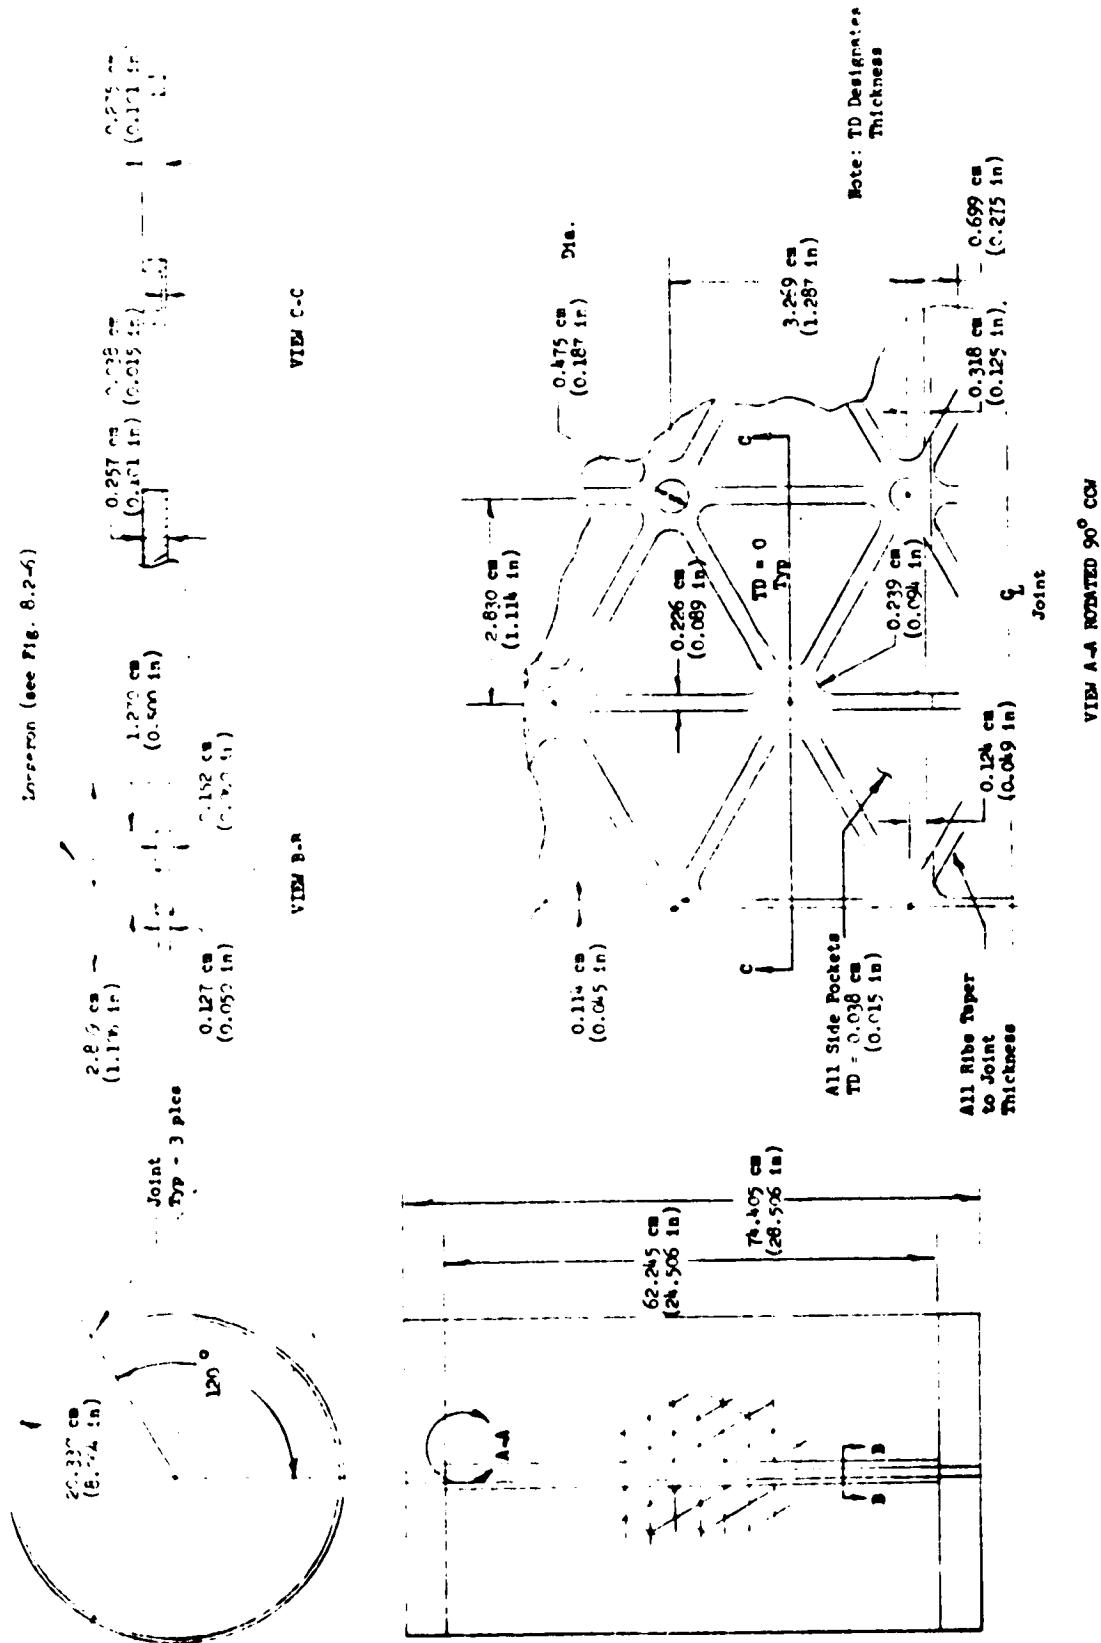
Configuration and Dimensions of Unskinned Isogrid Cylinder
